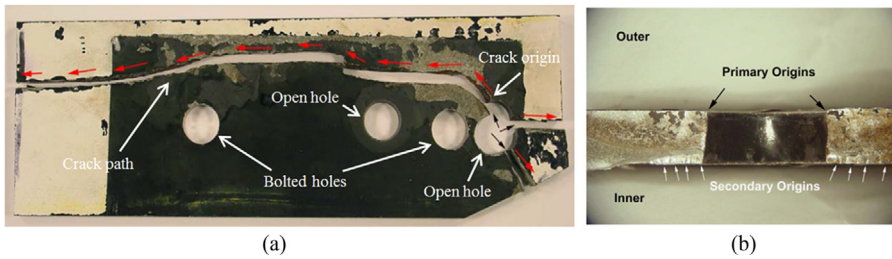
(a) Complete crack propagation directions on frame section. (b) Failure origin on analysis.
